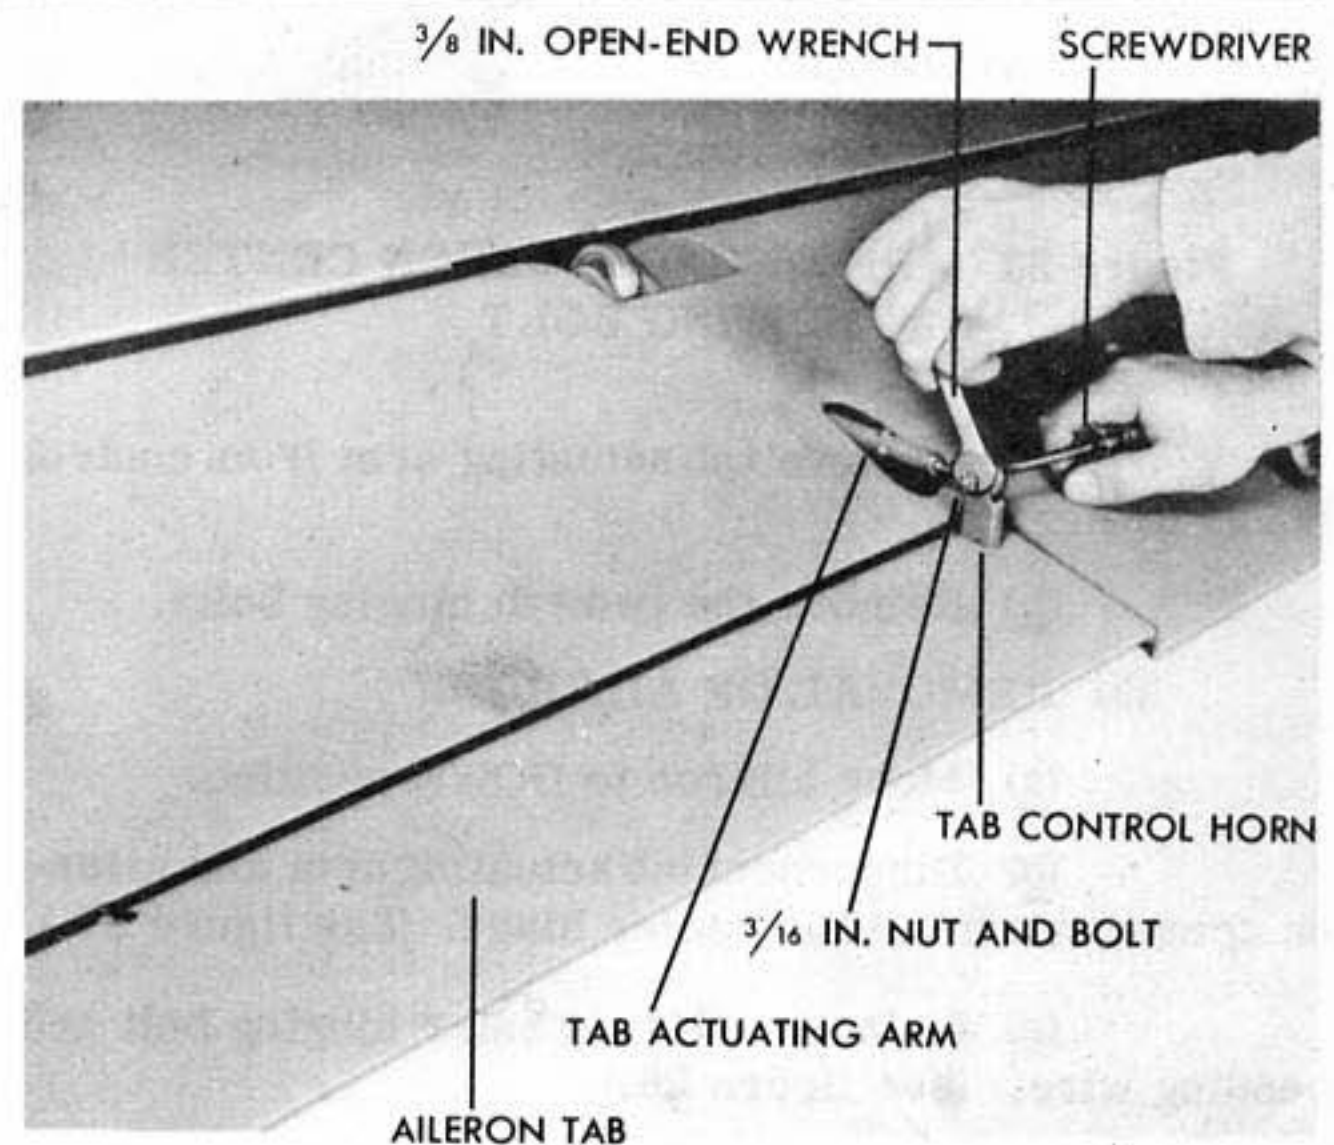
DISCONNECTING AILERON TAB ACTUATING ARM
